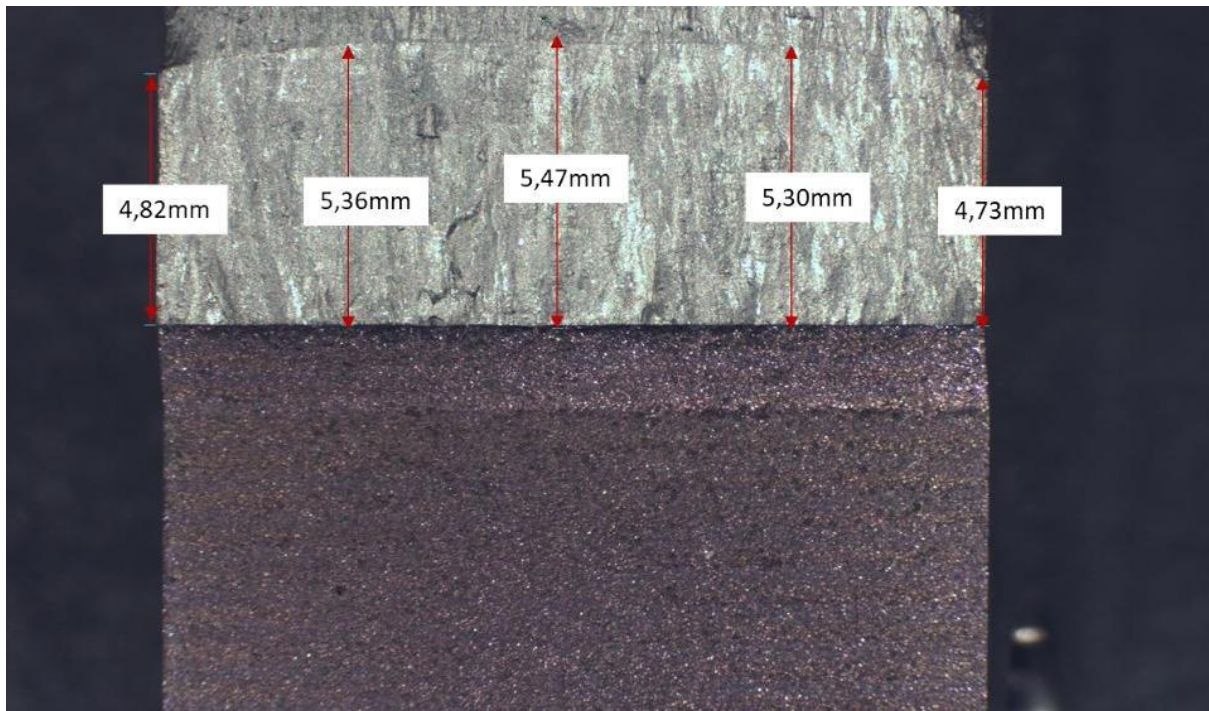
Fracture toughness crack measurement for 6.0 m/s 3
